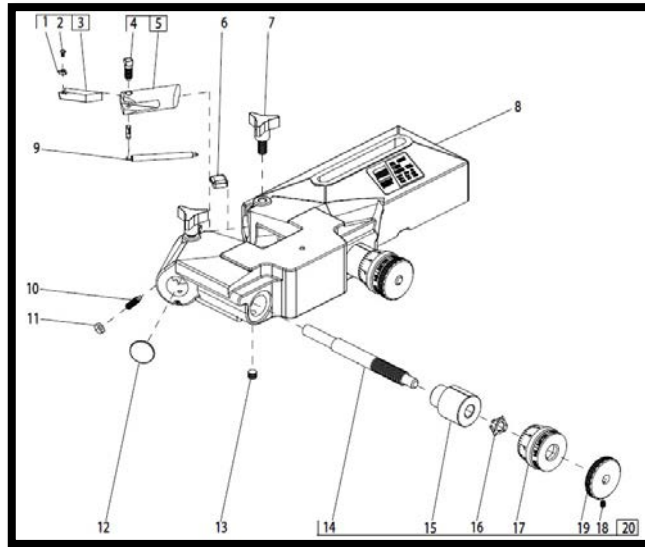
Exploded drawing of A6950 Ammco Style Twin Cutter (Ammco Model 4000E Drum & Disc Brake Lathe, n.d.)
